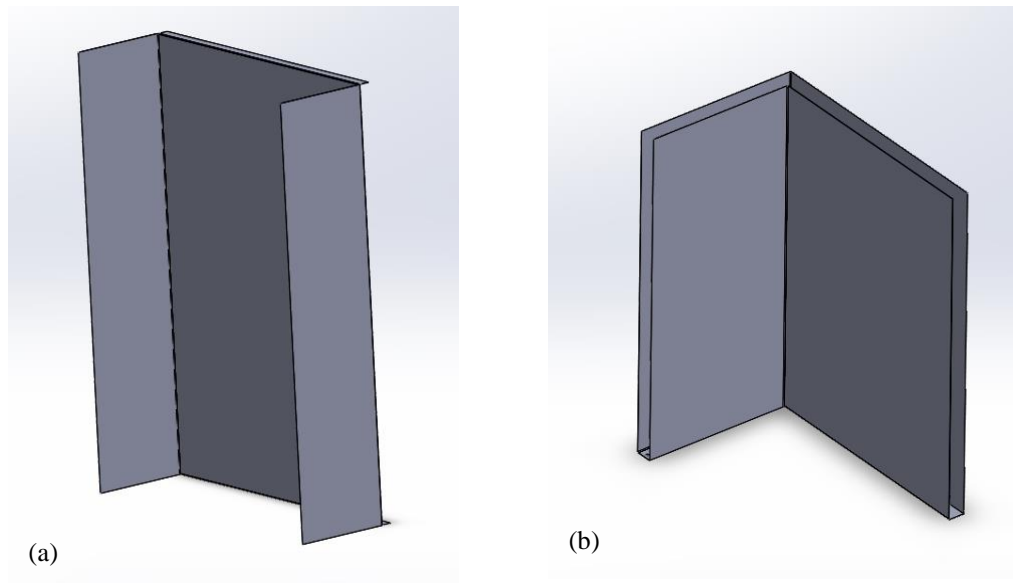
(a) Middle casing; (b) Section view of the exterior and middle casing forming the insulation layer.
